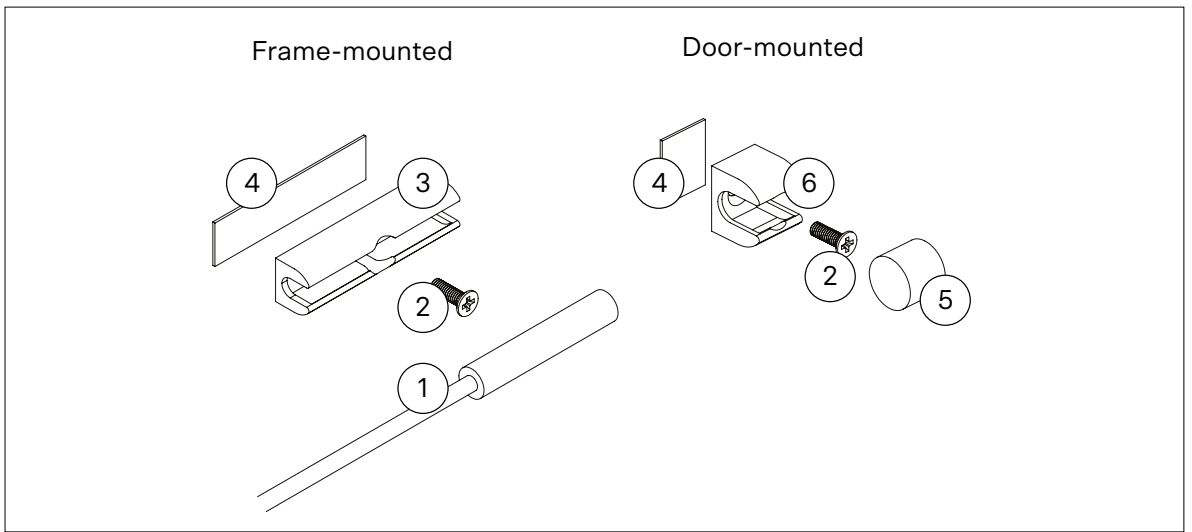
Door switch set: 1) Door switch with connection cable, 2) Screw 3) Frame switch holder 4) Sticker 5) Magnet 6) Door magnet holder
